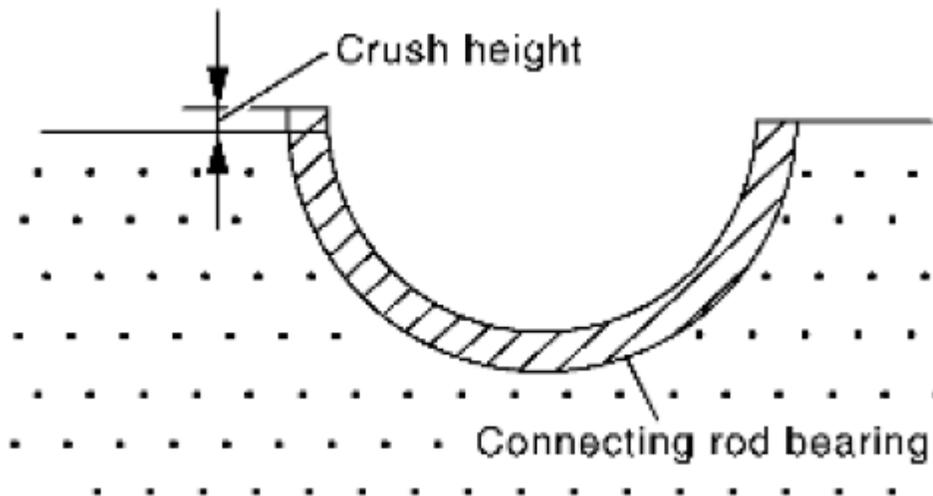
Identifying Connecting Rod Bearing Crush Height
